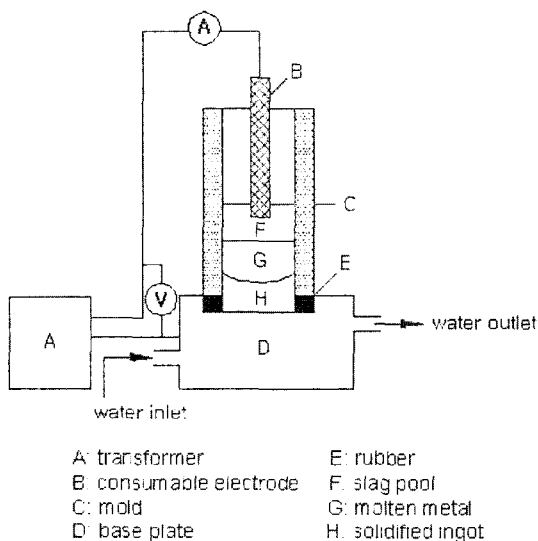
Schematic drawing of electro-slag casting (ESC) process
